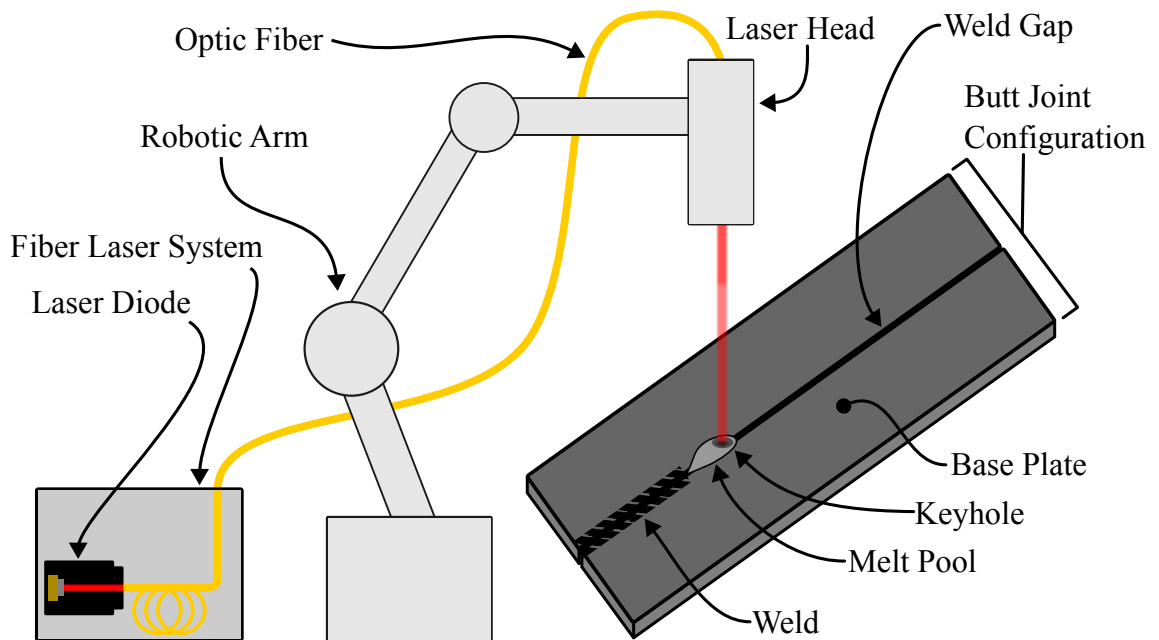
Scheme of robotic arm laser welding with material plates in a butt-joint configuration.
